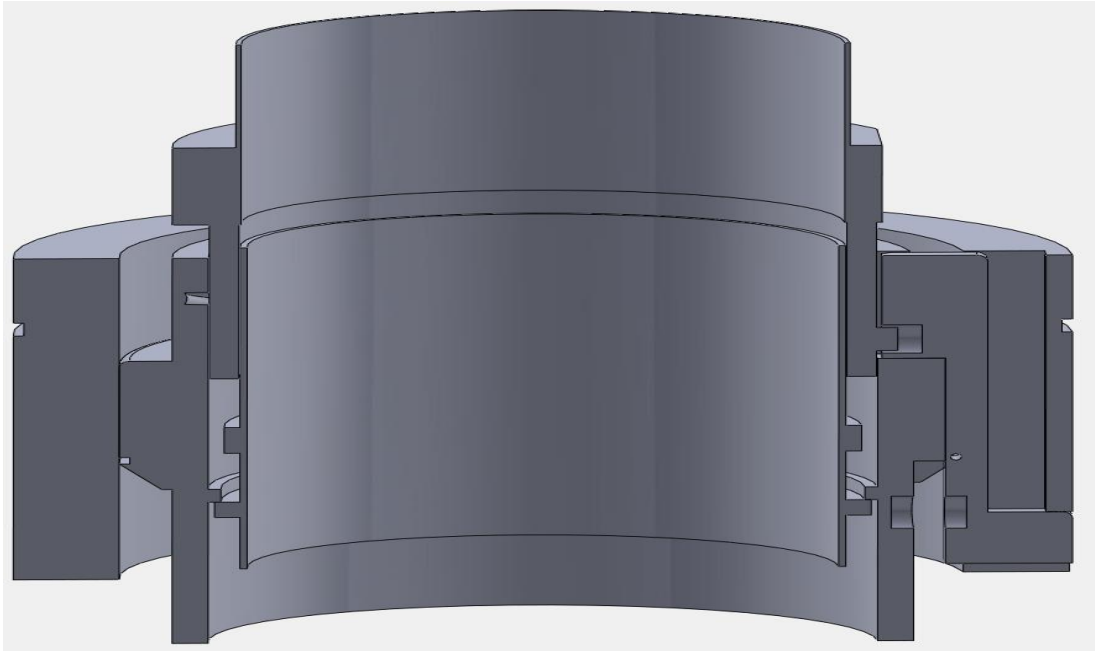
Modified spring-loaded latch and lever release mechanism (cross-sectional view)
